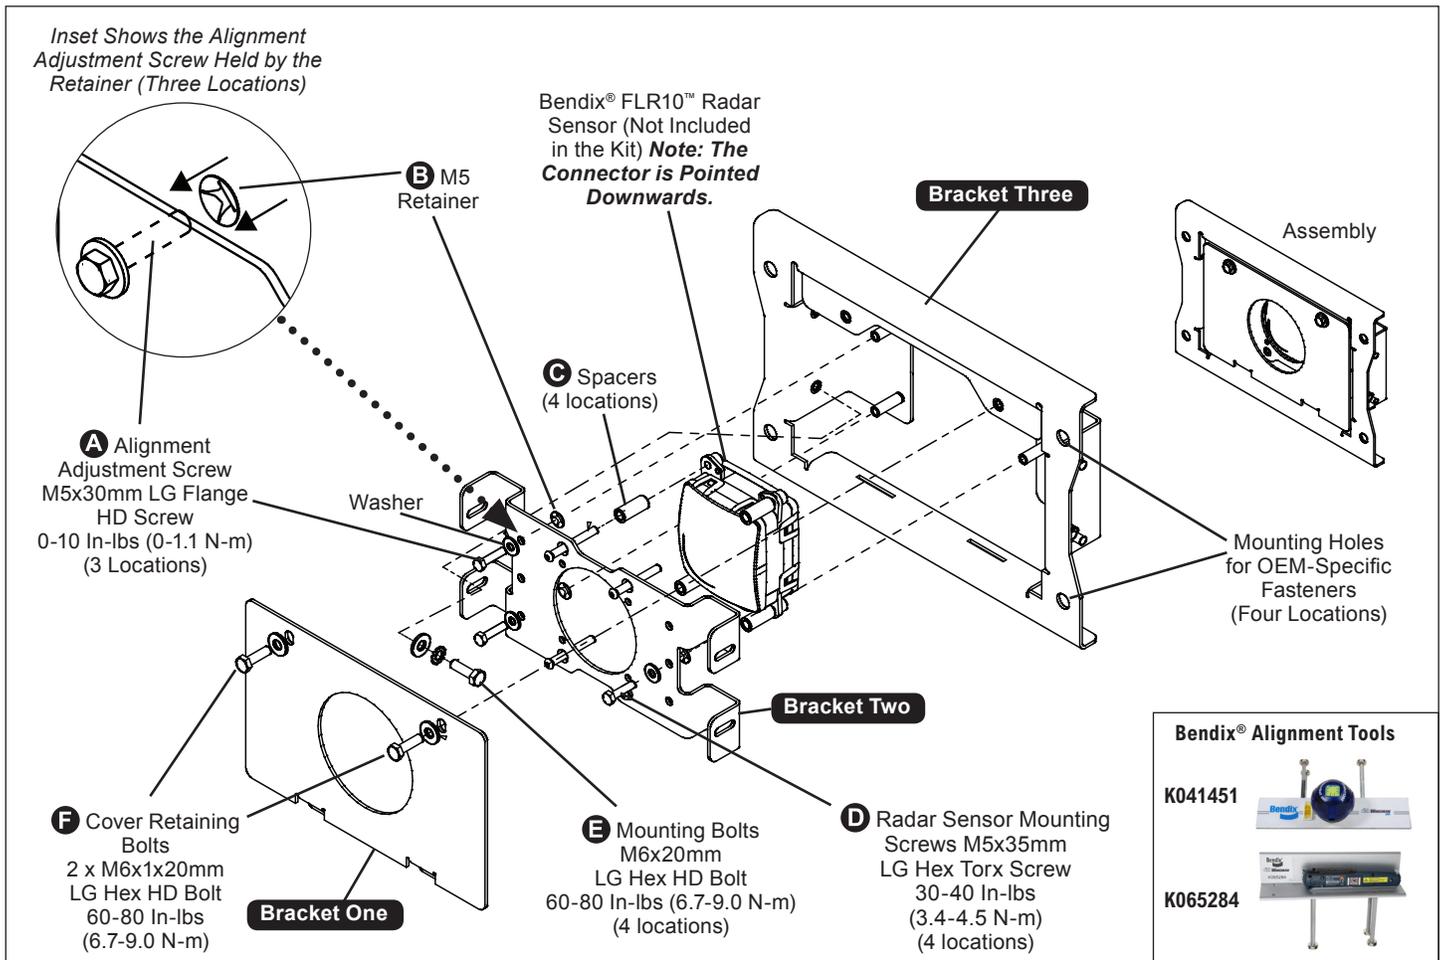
EXPLODED AND ASSEMBLY VIEWS OF KIT COMPONENTS
